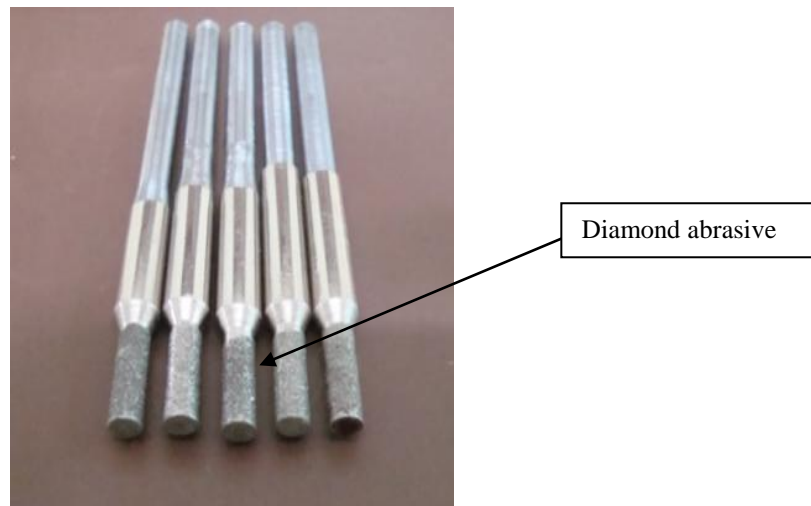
Φ 4 mm Tools with Abrasive Coating
